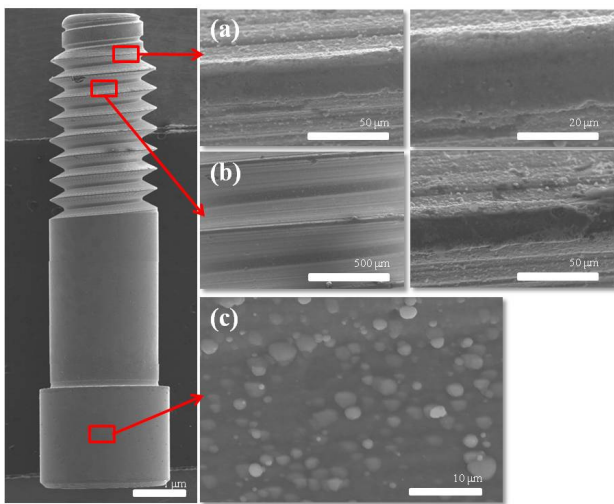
FE-SEM micrographs showing the TiN coated screw surface: (a) screw top, (b) screw flank and valley (c) screw head.
